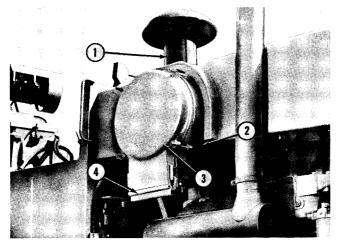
DRY AIR CLEANER, MOUNTED
